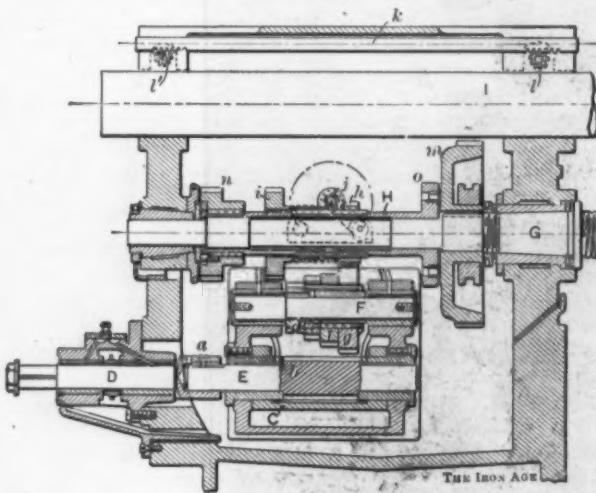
Vertical Section through Constant Speed Shaft and Spindle.
